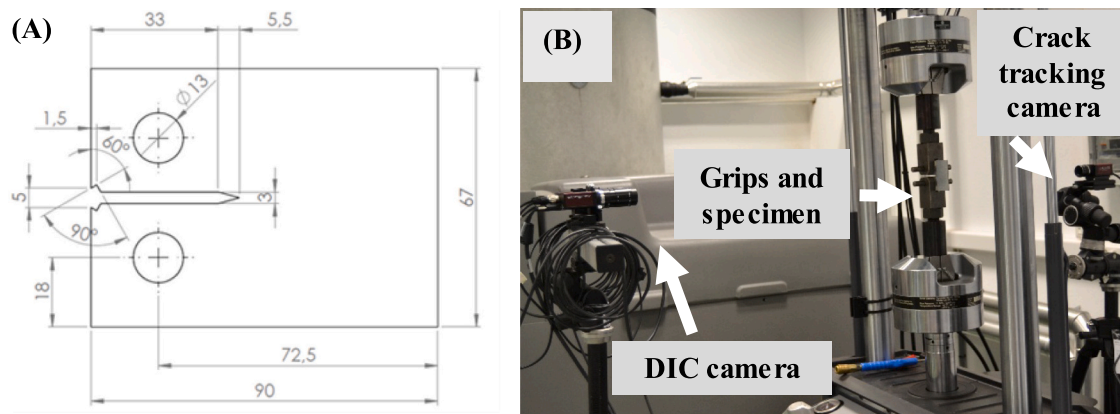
a) DCB Specimen drawing, b) Experimental set-up.
